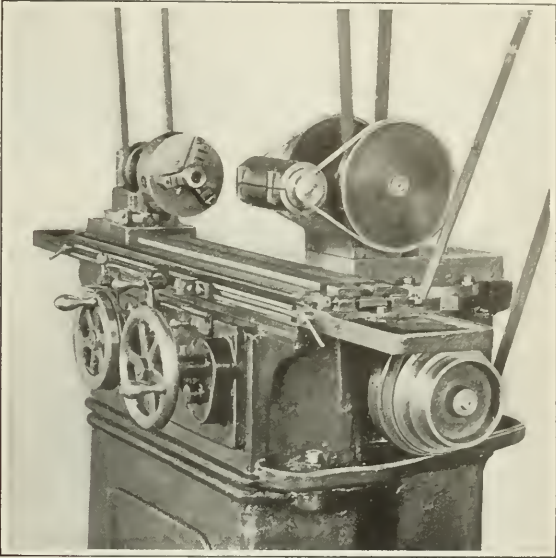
Fraser Universal Grinding Machine set up for Internal Grinding
